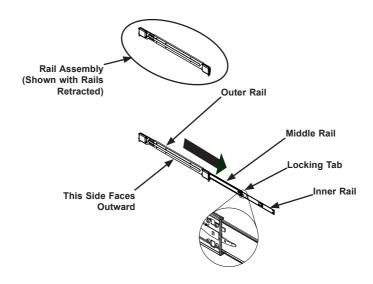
Identifying the Outer Rail, Middle Rail and Inner Rail (Left Rail Assembly Shown)
